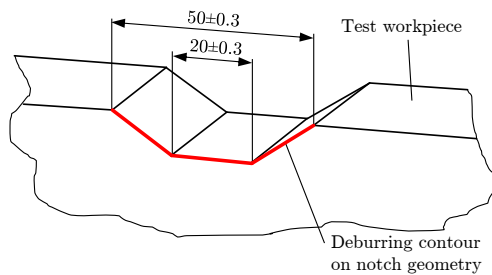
Geometry of test workpiece including tolerance information.
